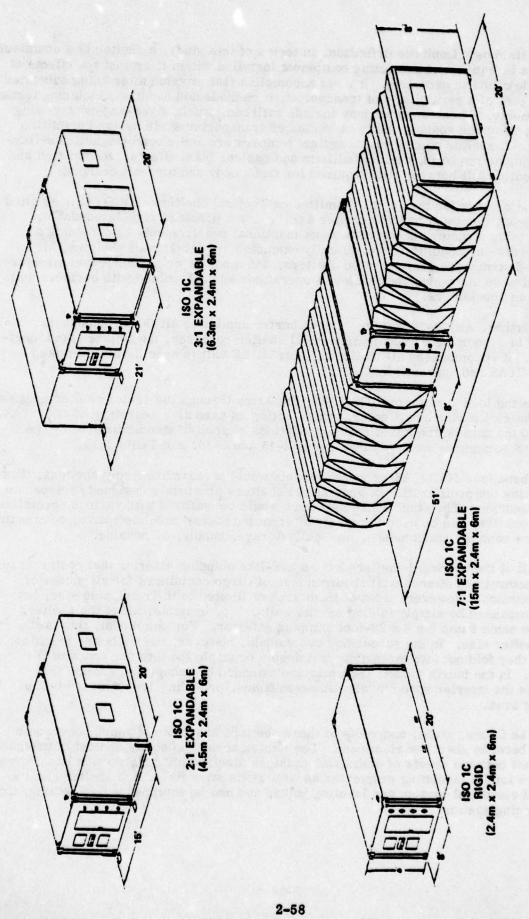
Family of Standard Rigid Wall ISO Shelters (Joint Committee on Tactical Shelters — JOCOTAS)
